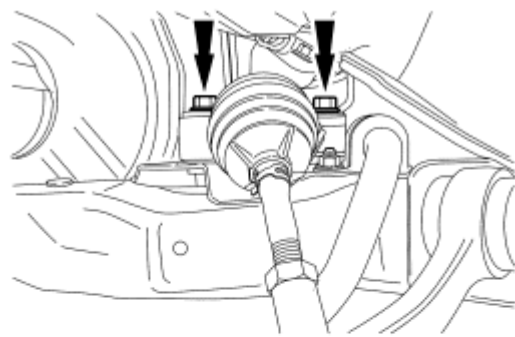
Locating Engine Roll Restrictor Bracket Bolts
